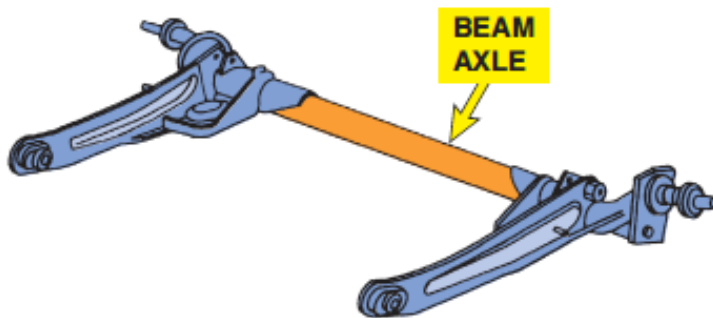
A solid rear axle can be damaged by improper lifting or towing.
